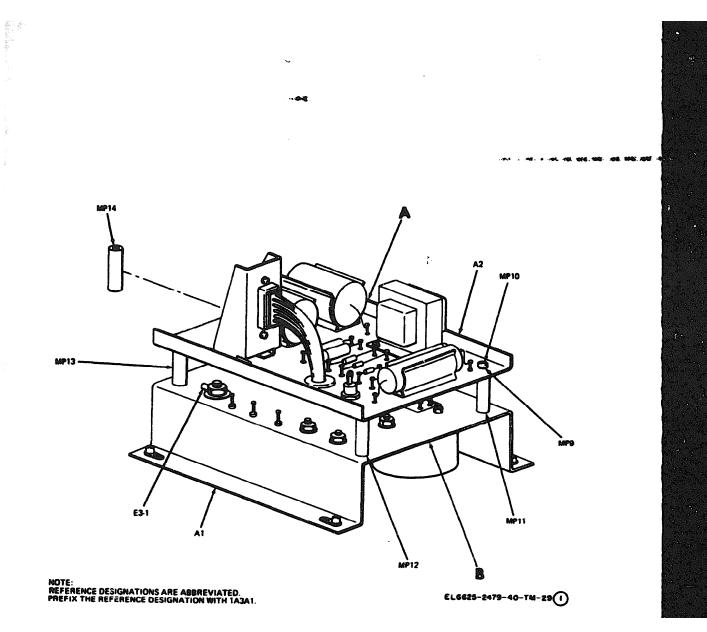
D. Power supply 1A3A1, parts location (part 1 of 3).
